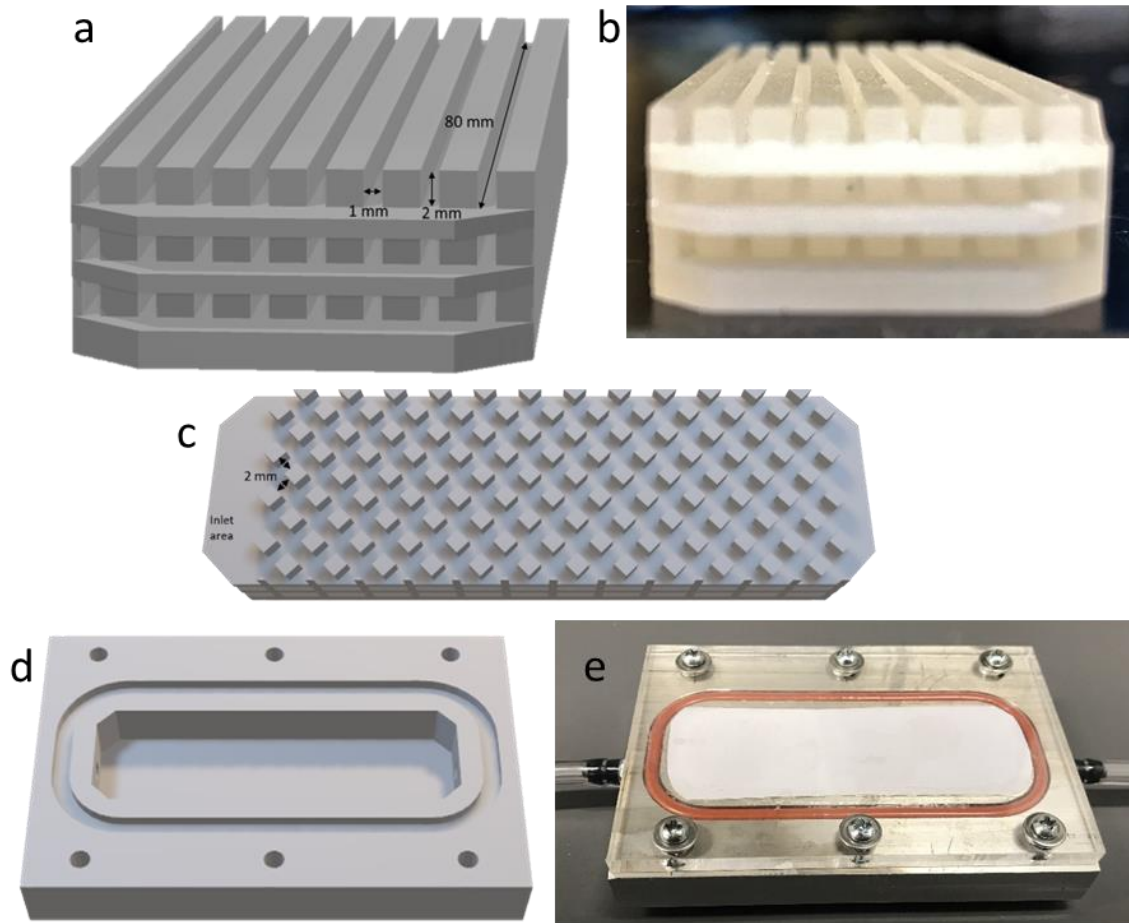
CAD designs and photos of microbioreactors. a) CAD design of Reactor 2-S (1x2 mm straight channels) b) 3D print of Reactor 2-S, c) CAD design of Reactor 4-P (2x2 mm patterned channels), d) CAD design of the reactor case bed, and e) the machined case with a microbioreactor sealed by waterproof tape and the acrylic lid for operation.
